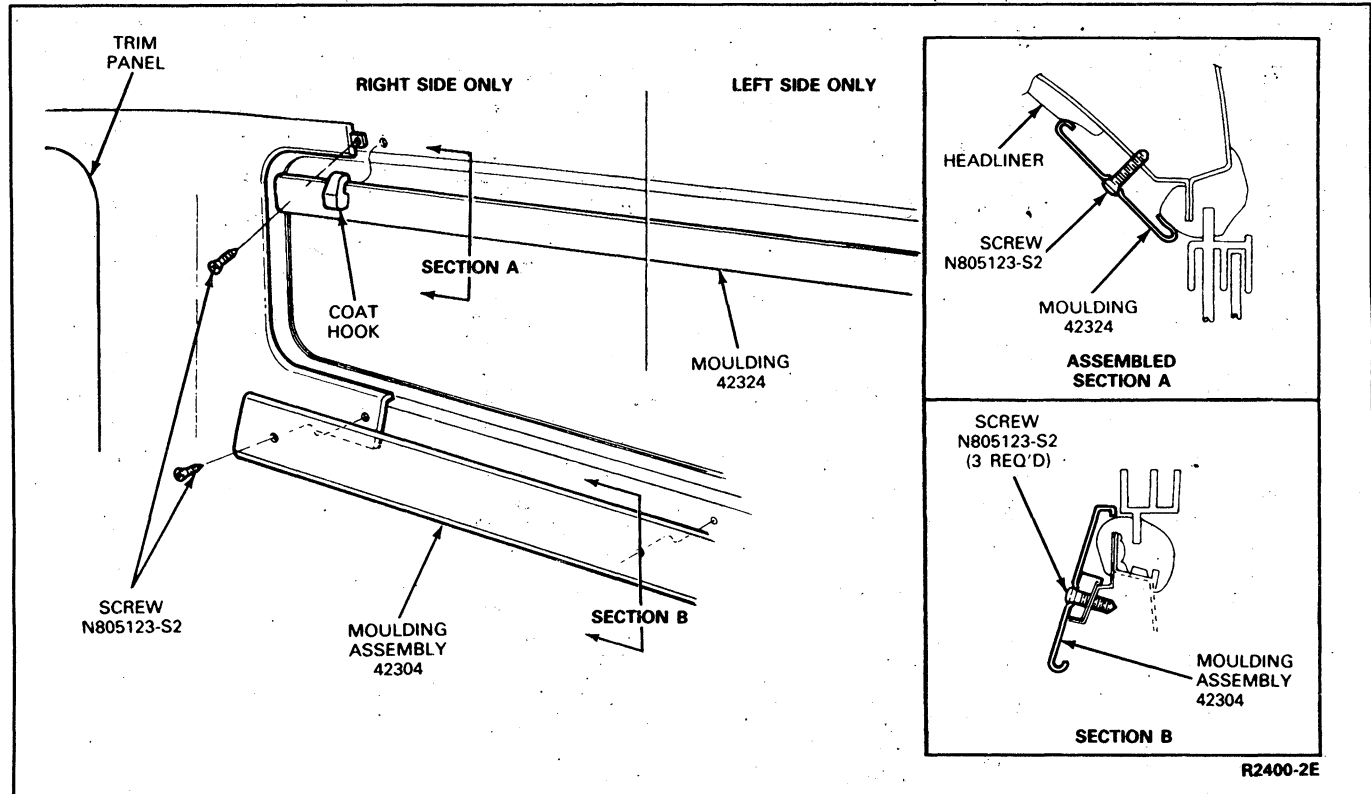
Back Window Garnish Moulding—Hi Series—F-150—F-350 and F-Super Duty
